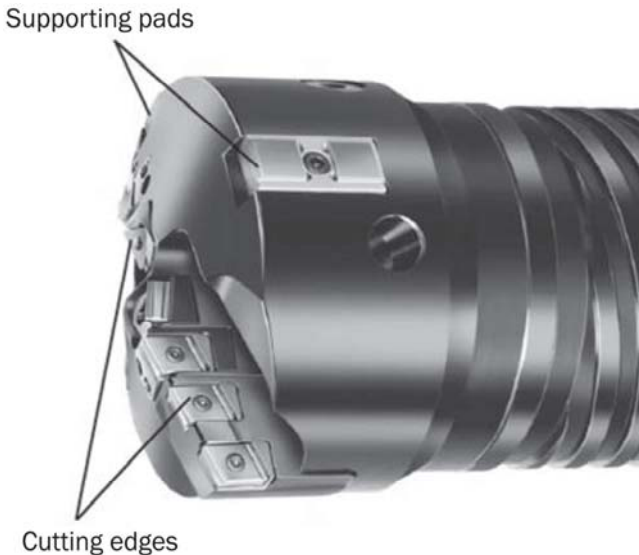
BTA drills head with a set of indexable inserts ($d > 65$ mm)
